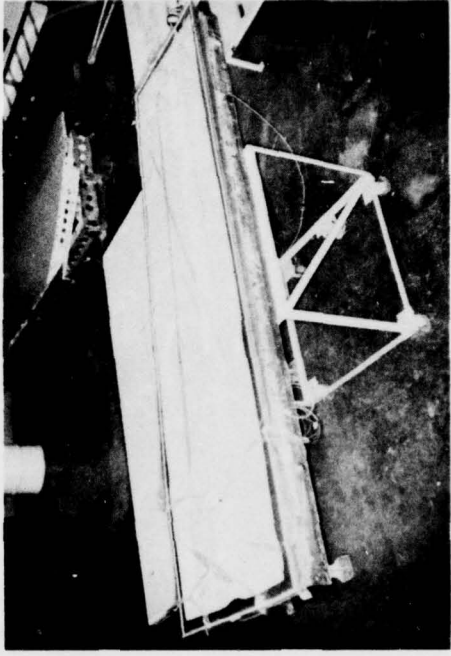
BAGGED PART AND SPECIMENS, READY
